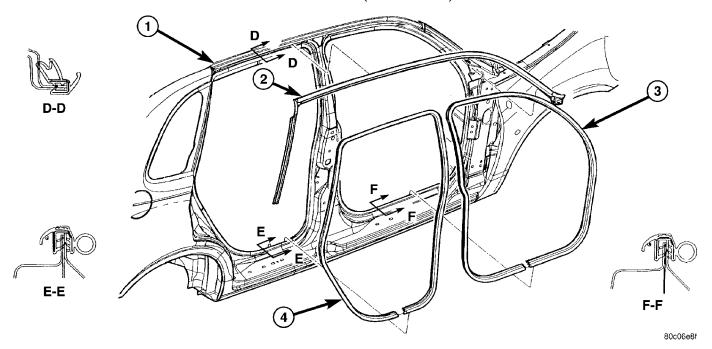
FRONT DOOR BODY MOUNTED WEATHERSTRIP
